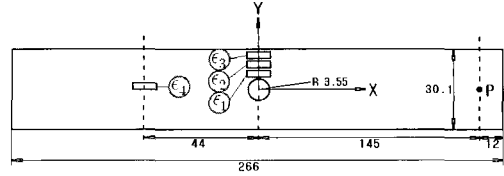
Dimensions and positions of 4 gages in specimen (unit: mm)
